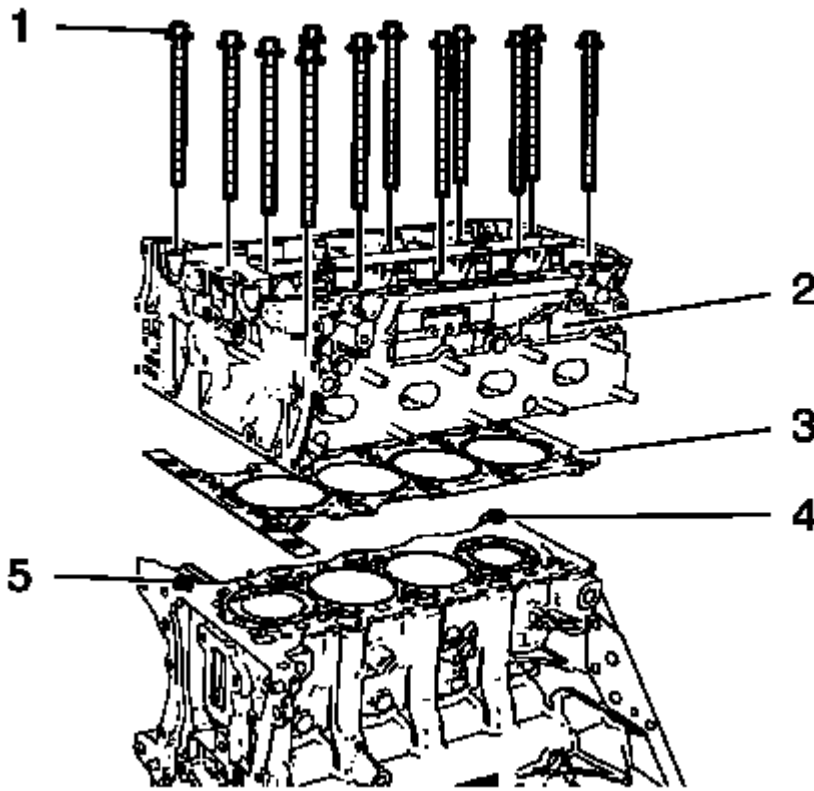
Cylinder Head, Gasket, Bolts And Guide Sleeves
